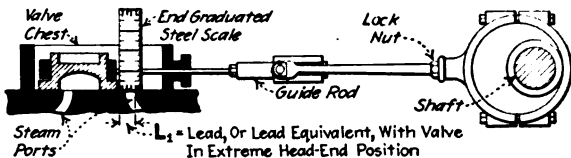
Determining L_1 —eccentric of a plain slide-valve engine in extreme head-end position. (Exhaust port not shown.)
